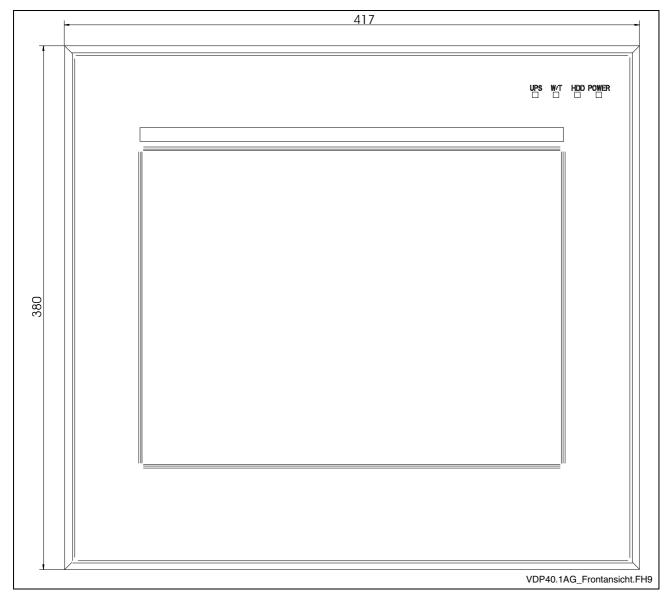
Dimensions – Front panel VDP 40.1AG
